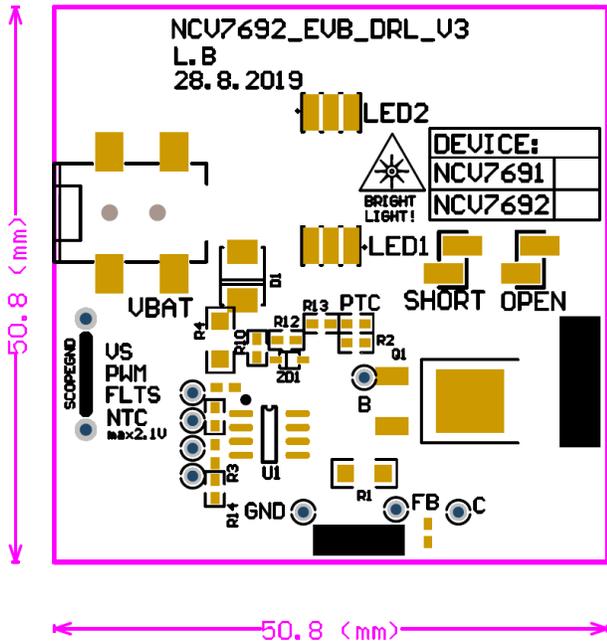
NCV7692 DRL EVB PCB Top Assembly Drawing
